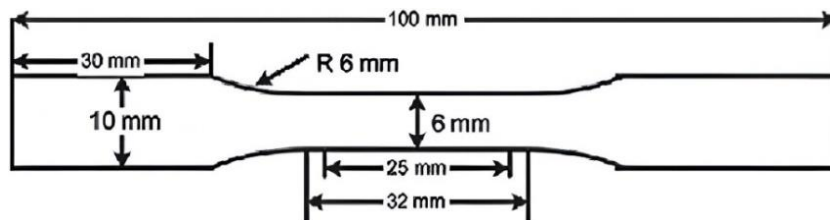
ASTM E8/E8M-16a (subsize tensile test specimen)
